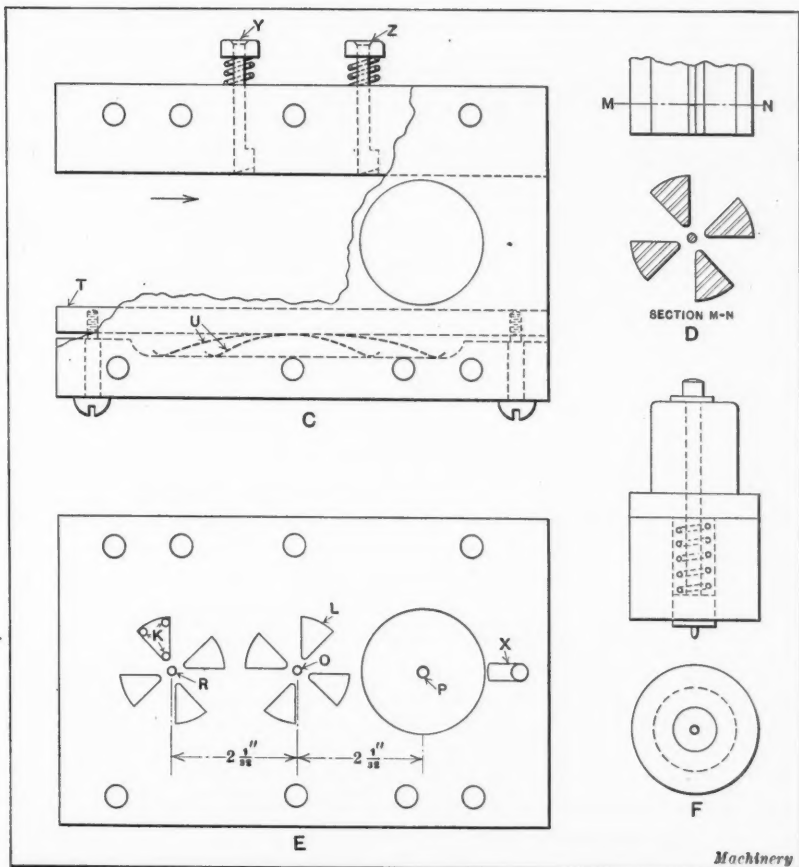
Stripper, Follow-die, and Punches of Improved Design
